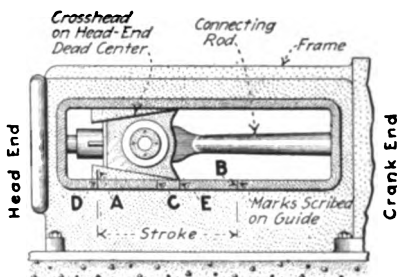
Method of marking crosshead guides for setting valve for equal cut-offs.
